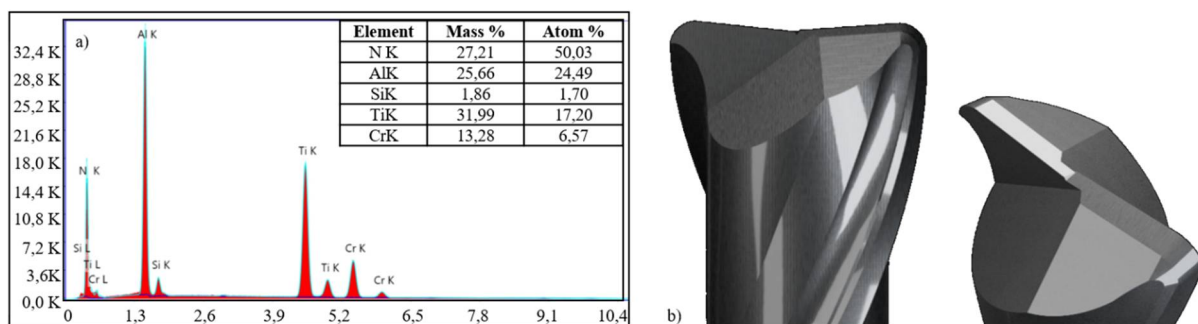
a) Result of the EDX analysis of the tool coating, and b) the accurate CAD model of the applied micro-milling tool.
